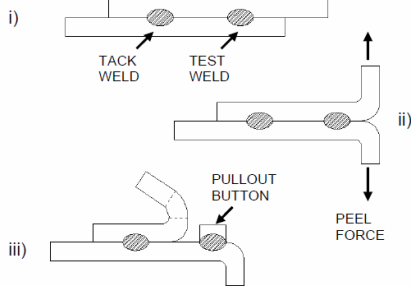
Peel test schematic. i) the peel test sample is welded tack weld first, then test weld. ii) the ends of the sample on the test weld side are bent back and a peel force is applied. iii) the weld is pulled to failure and either interfacial failure occurs yielding no button, or weld pullout occurs yielding a peel button.
